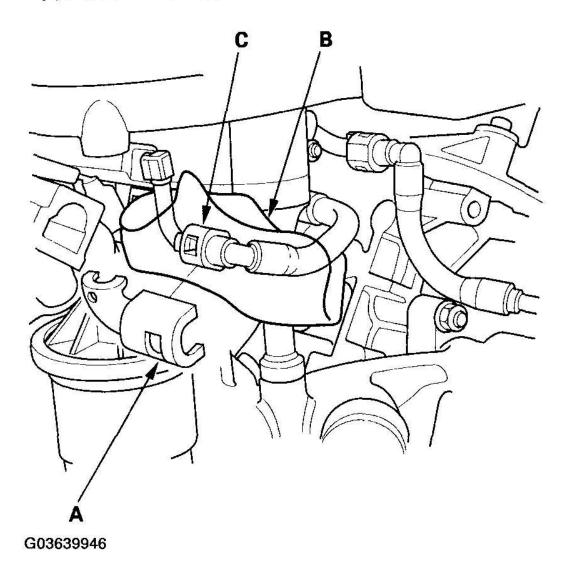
Removing Quick-Connect Fitting Cover (2003-04 Models) Courtesy of AMERICAN HONDA MOTOR CO., INC.
